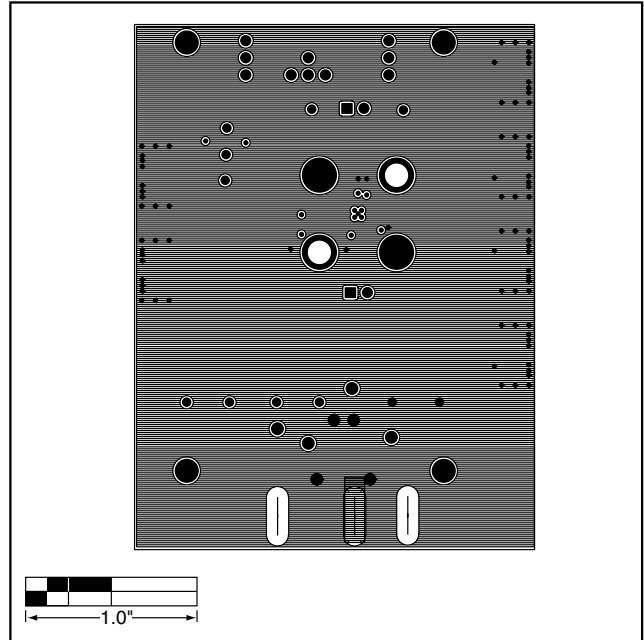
MAX3964ETP EV Kit PC Board Layout—Ground Plane
